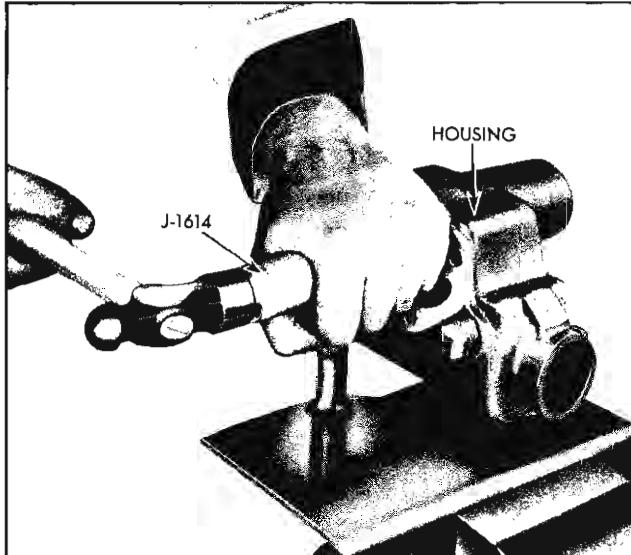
Removing or Replacing Pitman Shaft Bushing
